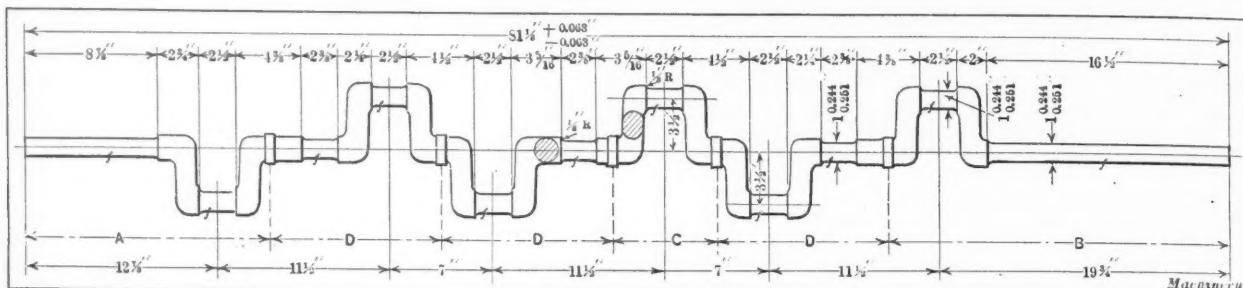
Six-throw Crank made by butt-welding Six Sections, after machining the Pins
